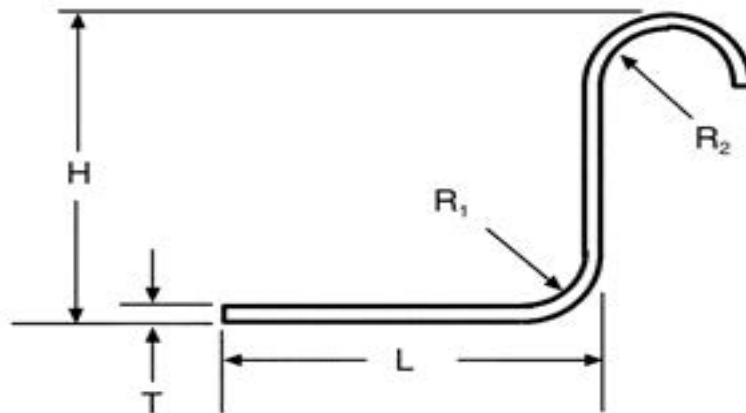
Sheet 3 : Extrusions and Formed Sections
